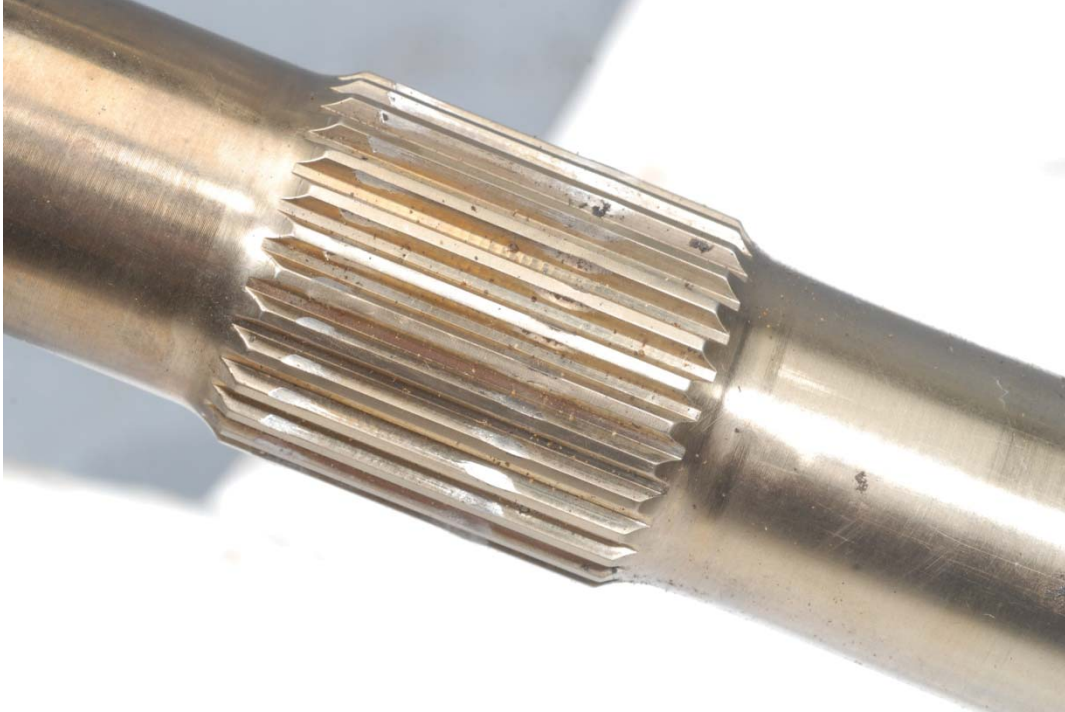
P-79001C, 4<sup>th</sup> DDFC Gear and Tach Drive Gear
